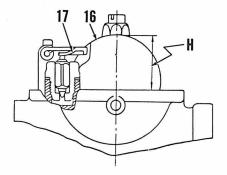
Float level (H) is adjusted by bending tang (17). Float bowl gasket should be removed when measuring.
